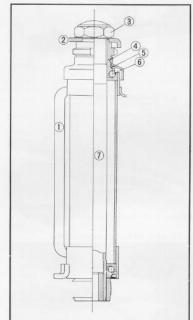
A Steering stem section diagram (S 90, CL 90, CL 90L)
